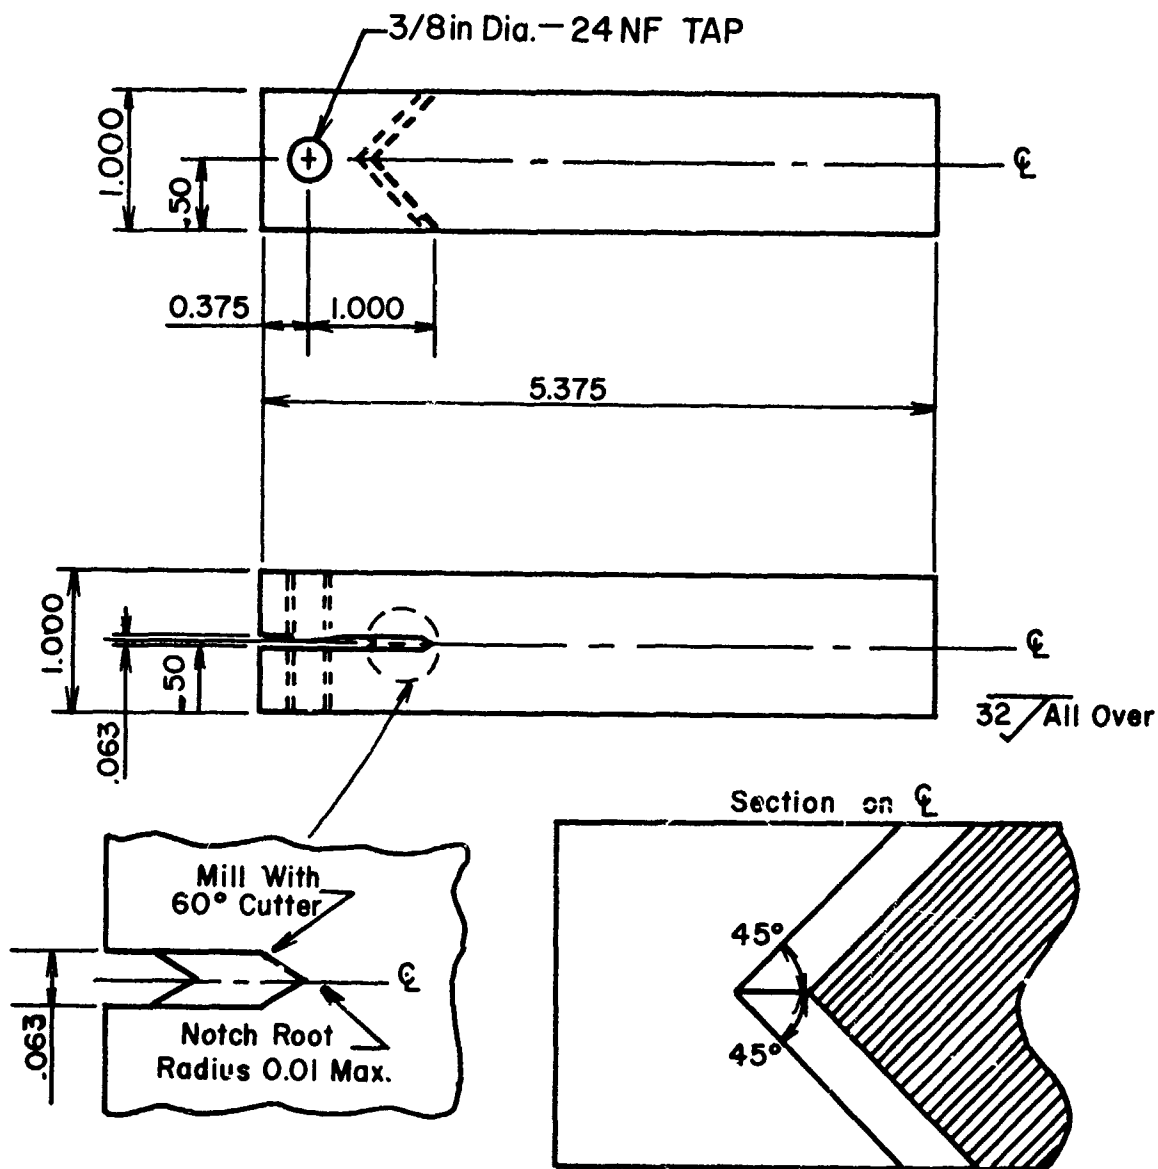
Configuration of Double Cantilever Beam (DCB) Specimen Used for SCC Tests
